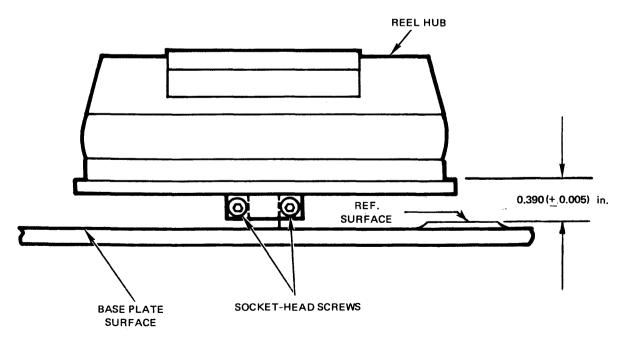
Reel Hub, Showing Adjustment Dimension
